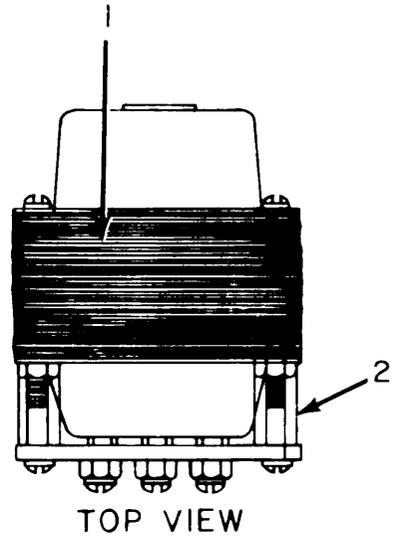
Voltmeter, Electronic ME-227/U, Terminal Board Assembly.
